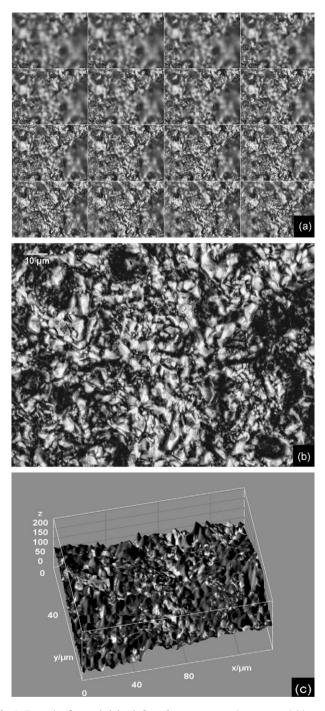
Example of extended depth-from-focus reconstruction process: (a) images stack at 1.0 mm from machined notch; (b) reconstructed image showing intergranular and transgranular aspects on fracture surface, for the crack growing from bottom to top (scale bar = 10μ m); (c) corresponding 3D elevation map, axes scales in [μ m].
